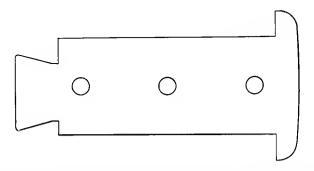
Field core stamping of electrical steel for revolving armature alternator (Allis-Chalmers Co.) showing dove-tail tenon to be cast into frame.
